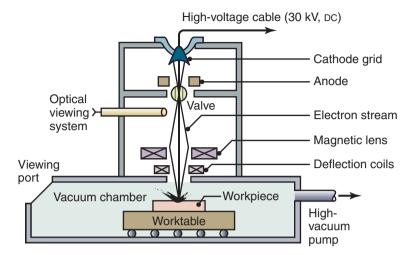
Schematic illustration of the electron-beam machining process. Unlike LBM, this process requires a vacuum, so the workpiece size is limited to the size of the vacuum chamber.
